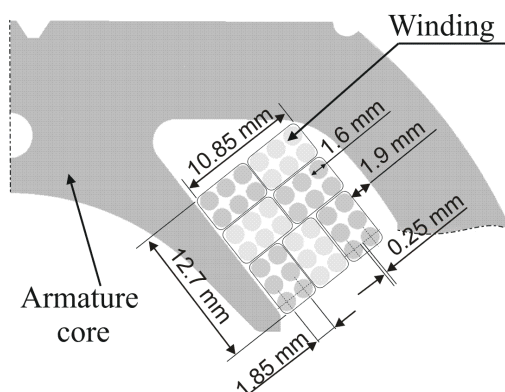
The armature cross section of investigated motor with winding and dimensions
